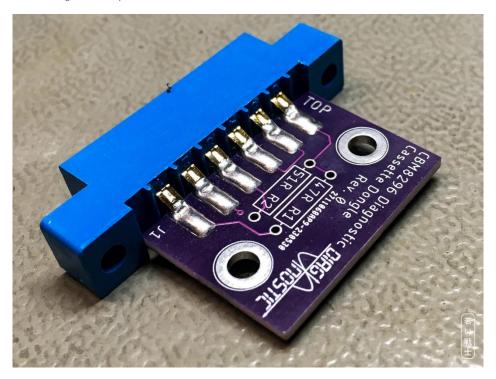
Step 2 and 3: The top latches are bent and solder to the solder pads on the top side
